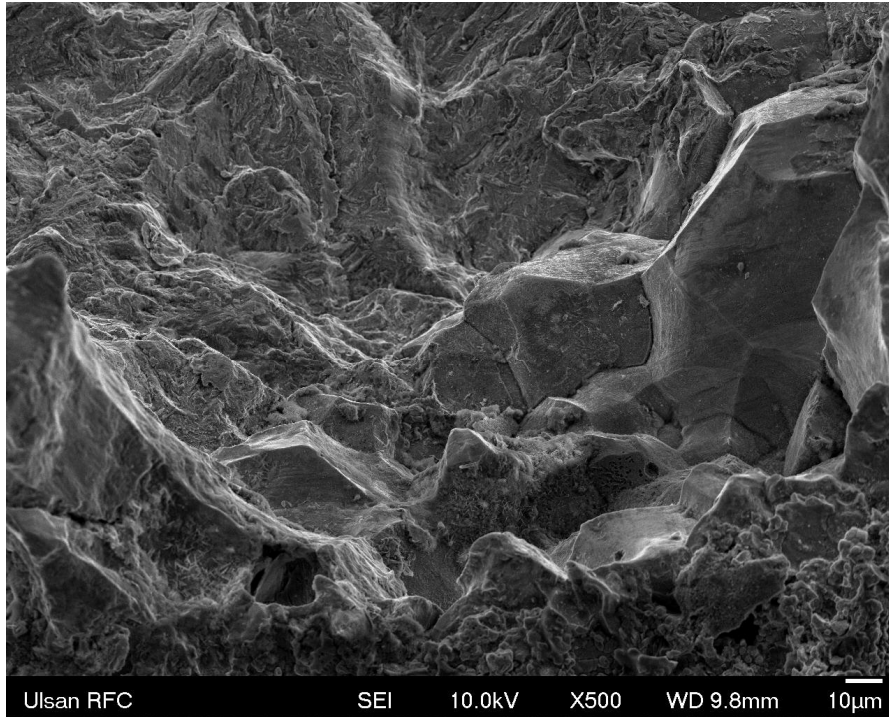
Fractographs of Y-groove specimens fractured at CE-33H specimen
